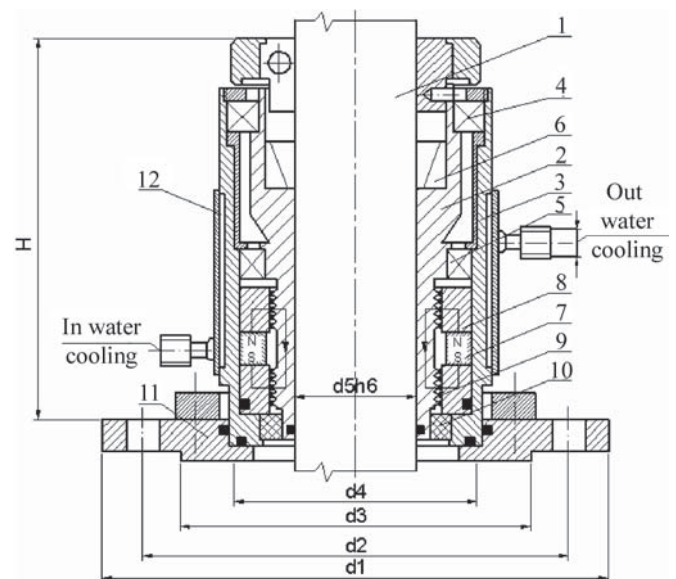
Magnetic fluid seal for vertical shaft with external cooling system, made by FerroLabs: 1 – shaft; 2 – rotating sleeve; 3 – stationary sleeve; 4, 5 – rolling bearings; 6 – clamping ring; 7 – permanent magnet; 8 – pole shoe; 9 – magnetic fluid; 10 – sliding ring; 11 – flange; 12 – water jacket
